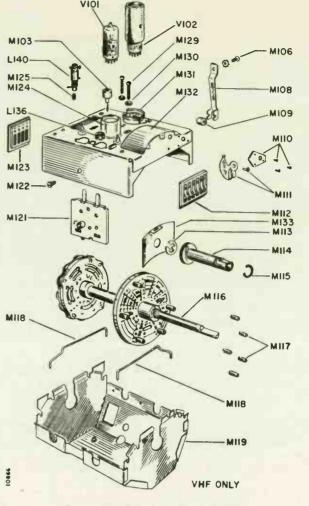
Exploded View of VHF Tuners 94E144-13, -19, -24, and -26.
